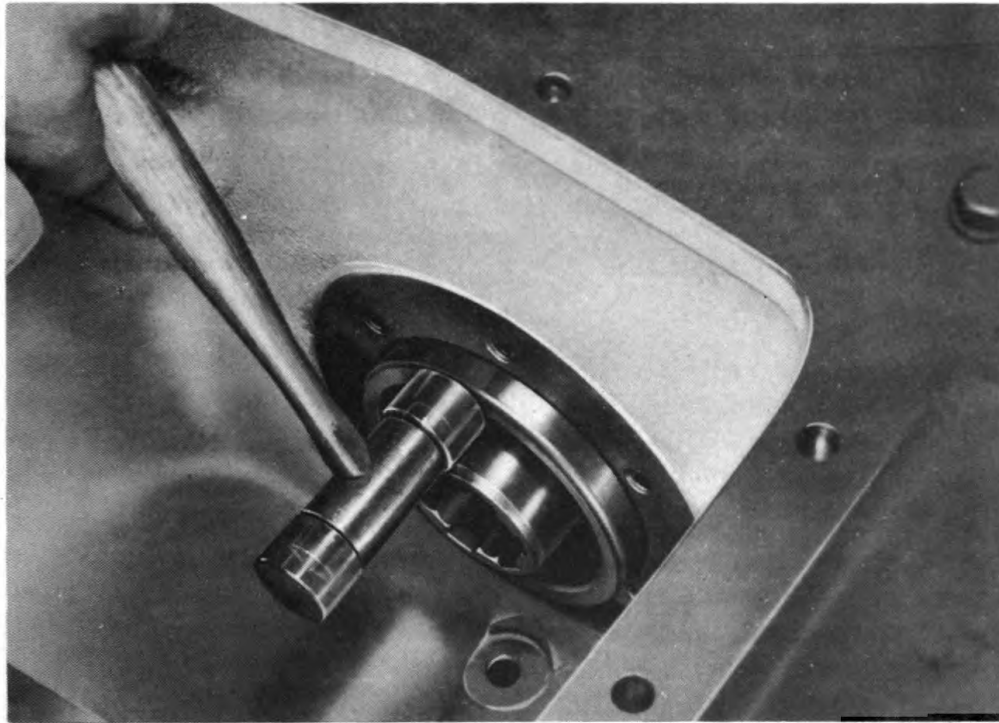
Installing Bevel Gear Hub Bearing Cup
